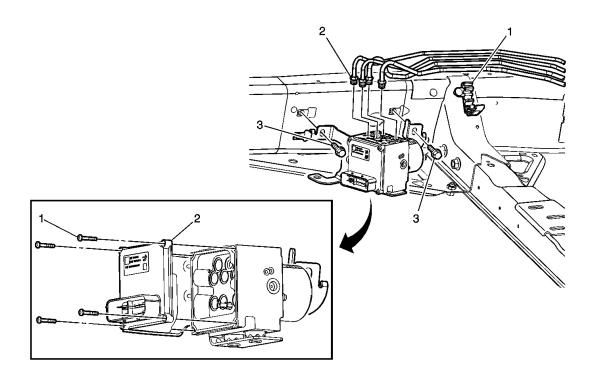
Locating Electronic Brake Control Module Courtesy of GENERAL MOTORS CORP.
